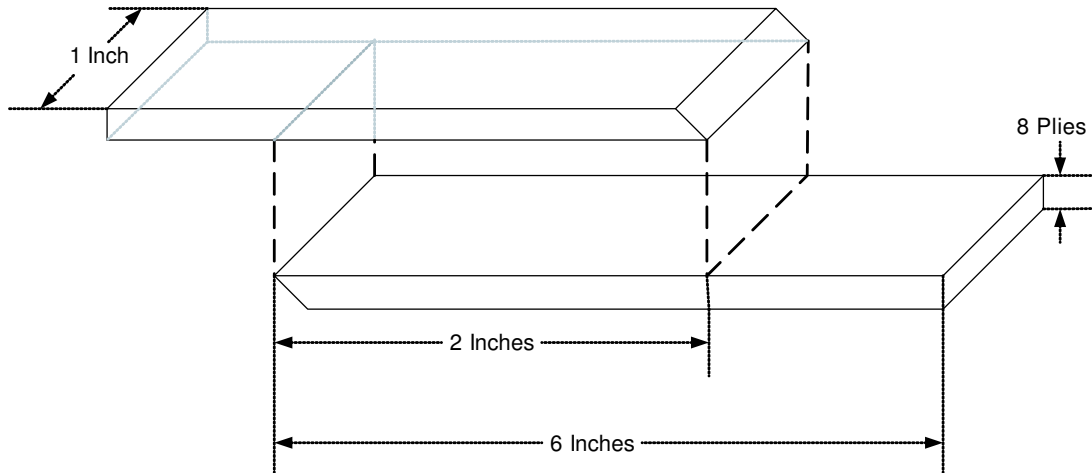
S2-glass/E733FR Single Lap Joint specimen geometry
